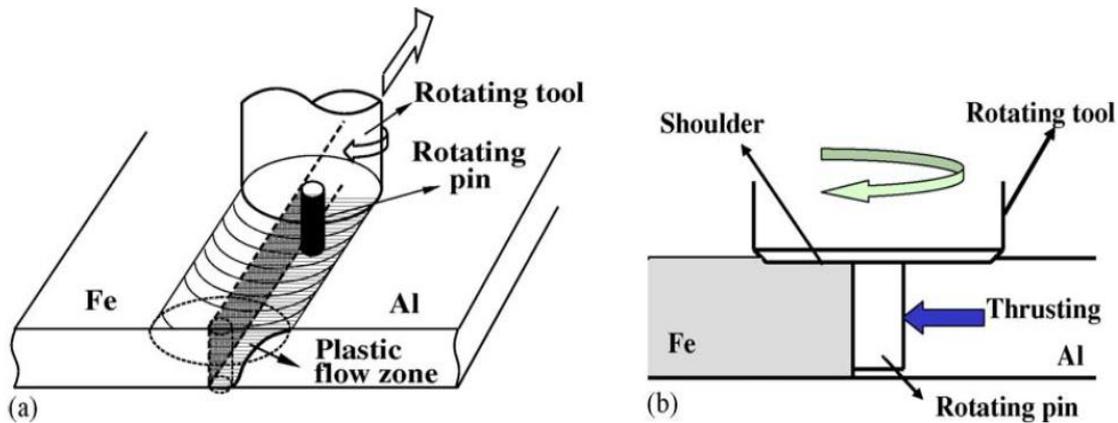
Rotating pin position: (a) birds eye view, (b) cross-section view perpendicular to the weld surface [32]
